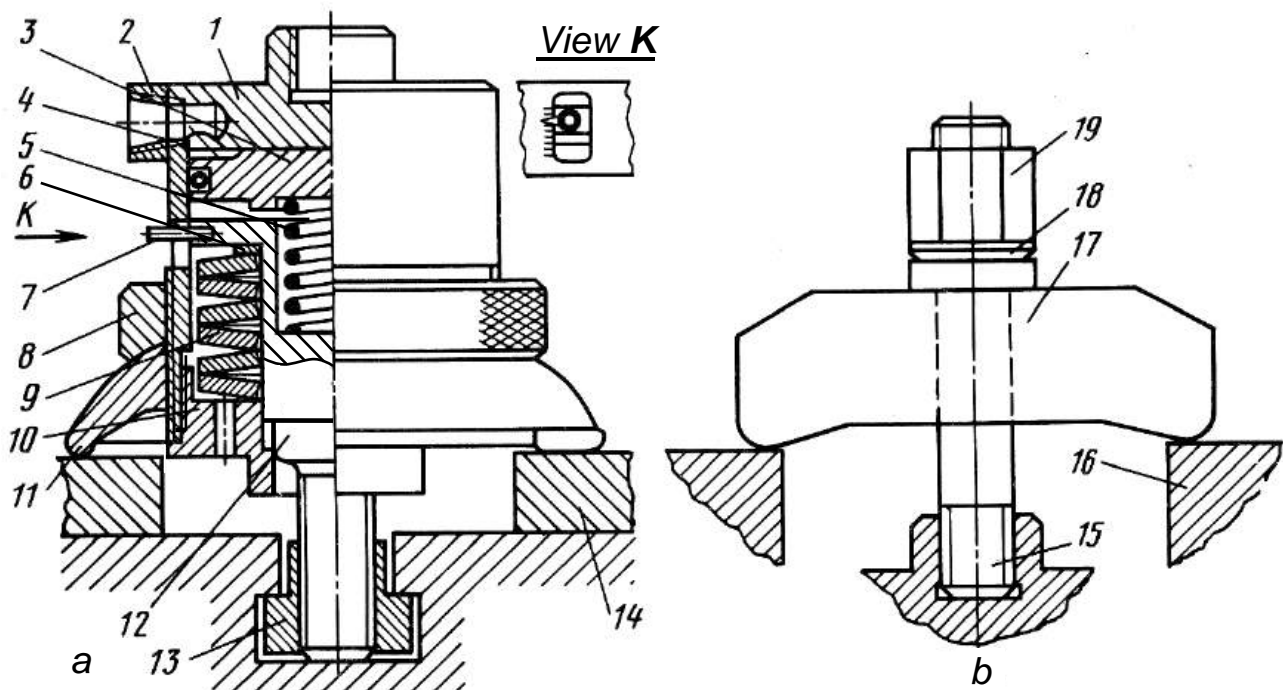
Diagrams of clamping device with pull hydraulic cylinder for small height (a) and large height (b) workpieces
